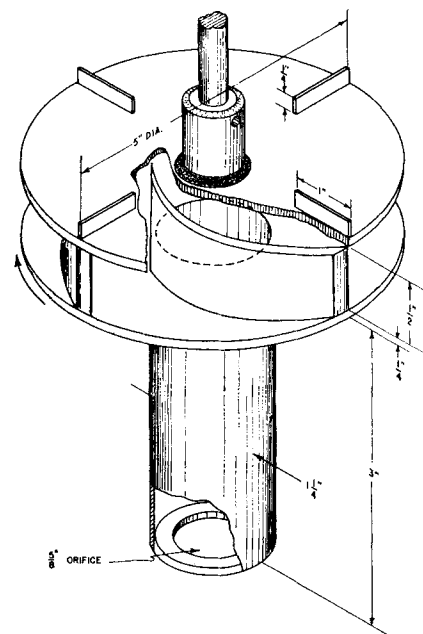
Isometric view of centrifugal impeller with mixing blades.
